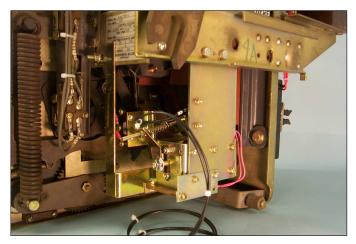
DTA Assembly Front Mounting Bracket Temporarily Secured to the Front Breaker Frame.
